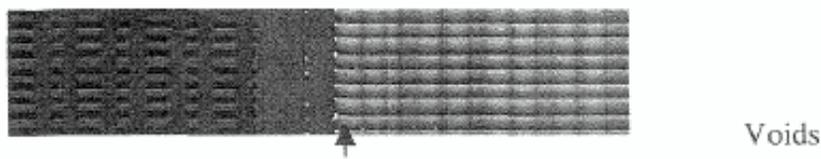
B-B cross section view of Figure 7 (the 1st set of parameters)
